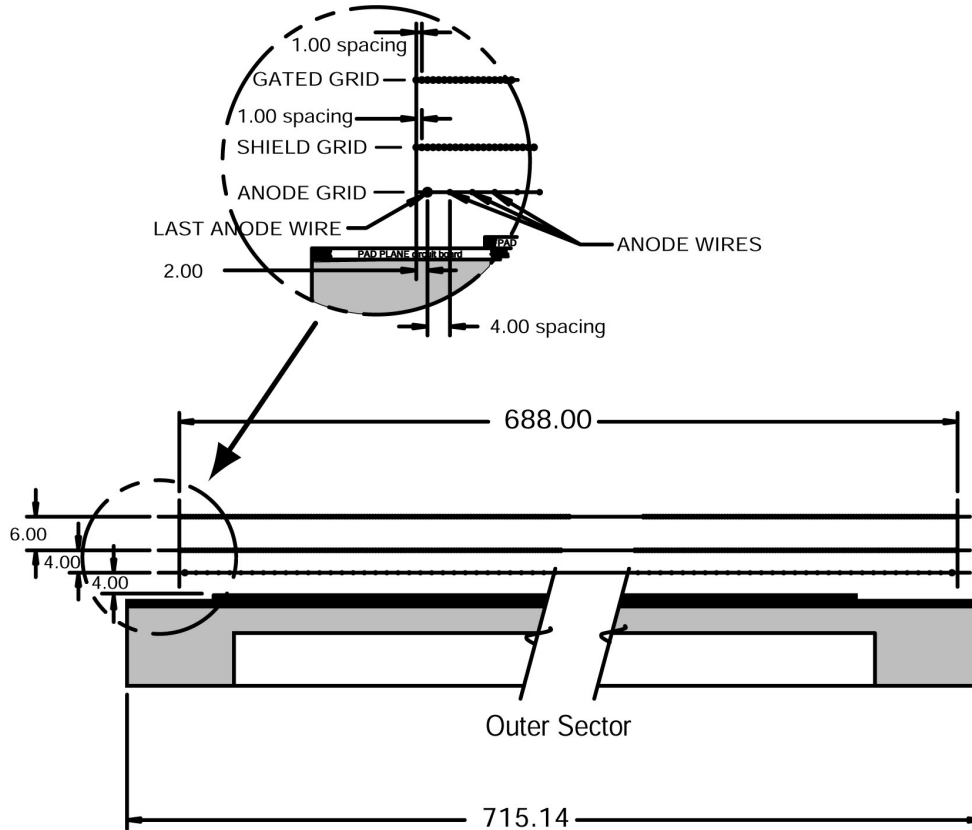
Scheme of TPC outer sector MWPC pad. All dimensions are in millimeters. Taken from Ref. [19].
